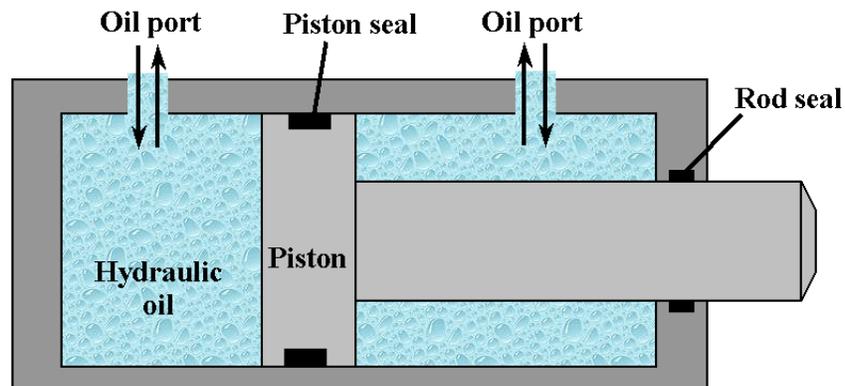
Typical hydraulic seals in a linear hydraulic actuator
